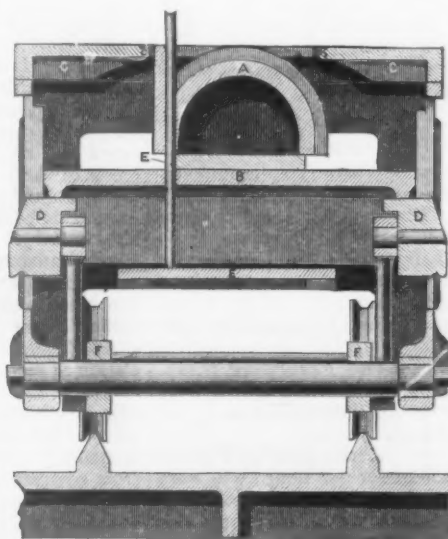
Section Showing Pattern Drawn through Stripping Plate.
